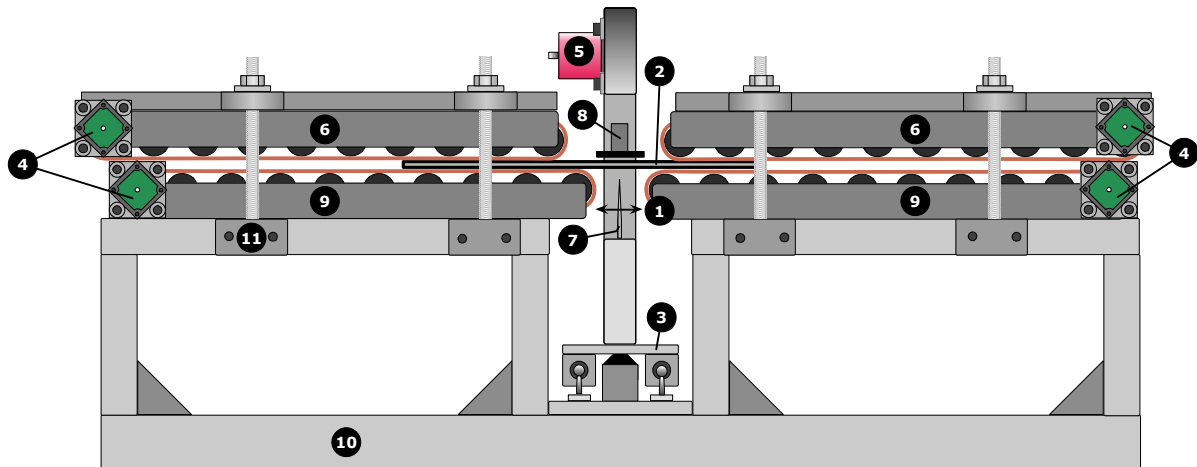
Side view of the CSM; ① stitching gap, ② preform and frame, ③ Y axis linear carriage, ④ X axis conveyor steppers, ⑤ stitching head and Z axis stitching head stepper, ⑥ X axis top conveyors, ⑦ sewing needle, ⑧ rotary hook bobbin, ⑨ X axis bottom conveyors, ⑩ base chassis, ⑪ top carriage alignment screws.
